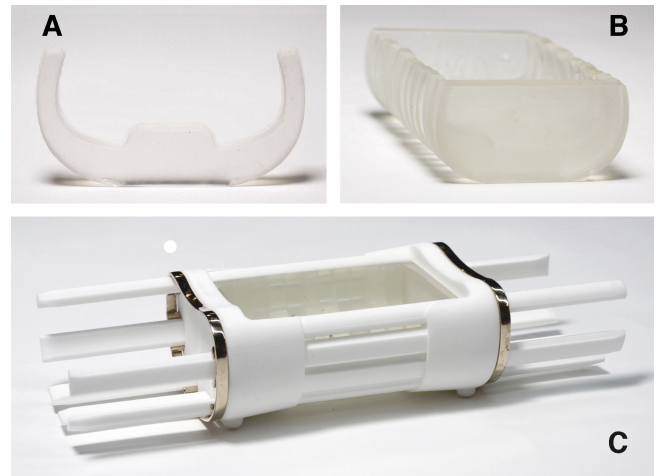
(A) A SORTA-Clear® 40 silicone rib-mold (DSR symbol A); (B) a linear assembly of 10 ribs, which are then clamped (C) to prepare the mold for casting the edible substance.
